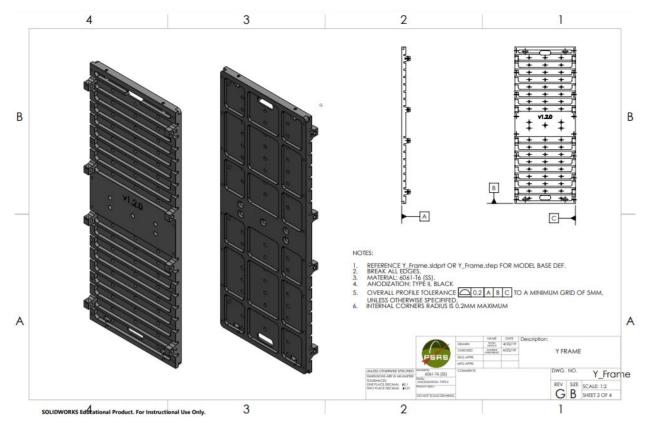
1 of 3 Dimensioned Drawing of the Y OreSat Frames
